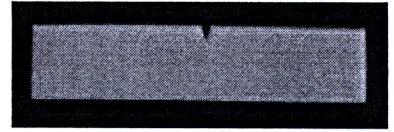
Izod impact testing (a); Bar shape specimen for Izod Impact Test
